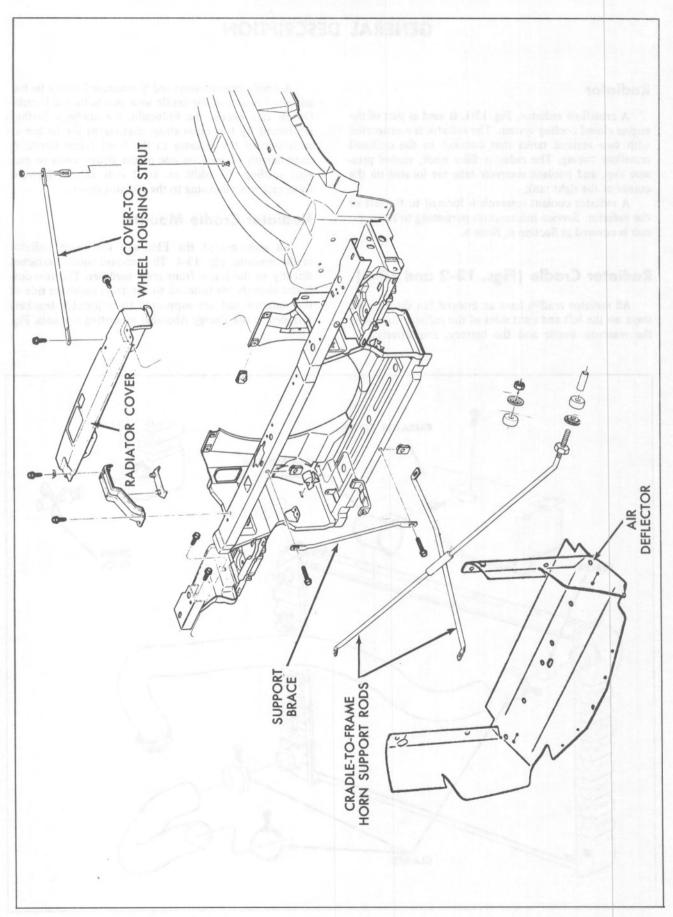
Radiator Craddle Assembly—Except Eldorado
